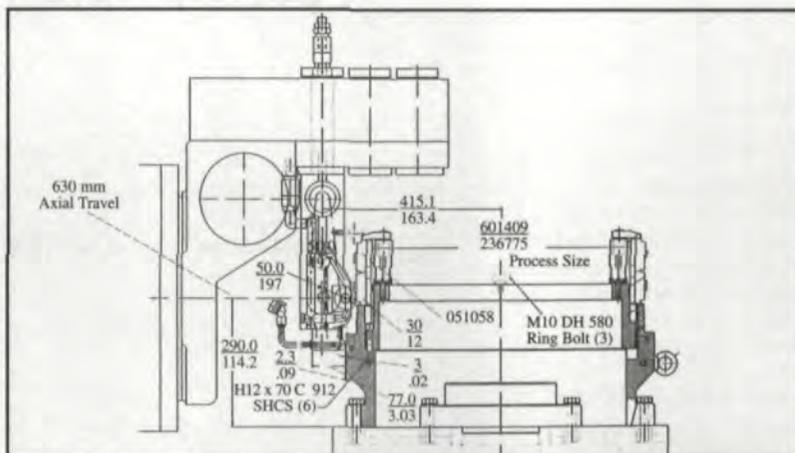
Layout of external grinding setup for 200-tooth, external ring gear spline shown in Fig. 1. Note the location of the grinding arm position on the grinding head relative to Fig. 3. The arm has been rotated for external grinding. The internal spur and helical grinding head can be used, with properly designed arms, for doing both internal and external work.
